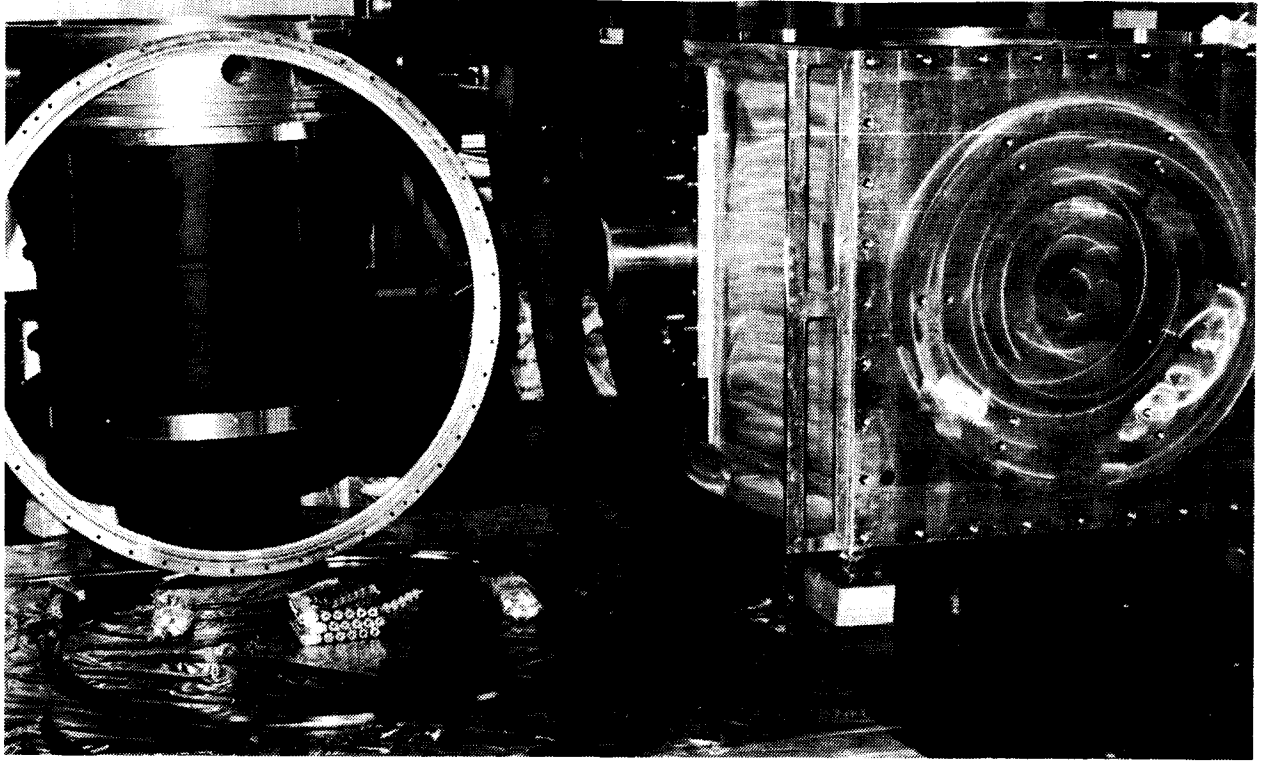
Spin Axis Shaft, Housing, and Bearing Components
